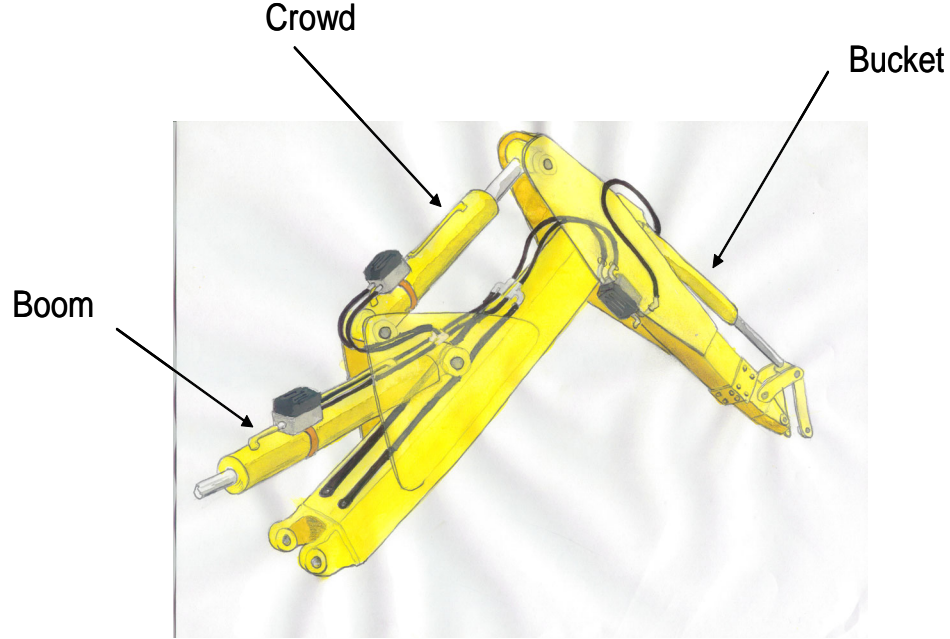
A backhoe mechanism showing the four-valve assembly mounted directly on the cylinders
